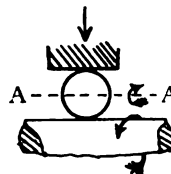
"RADIAL" TYPE BALL BEARING.
